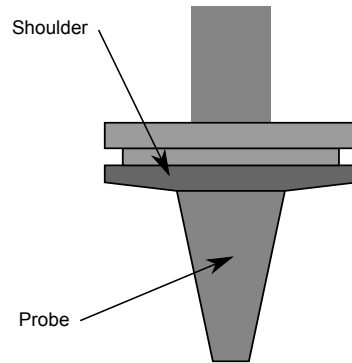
A schematic view of the tool used in friction stir welding. It consists of a shoulder and a probe that heats and stirs the material.
